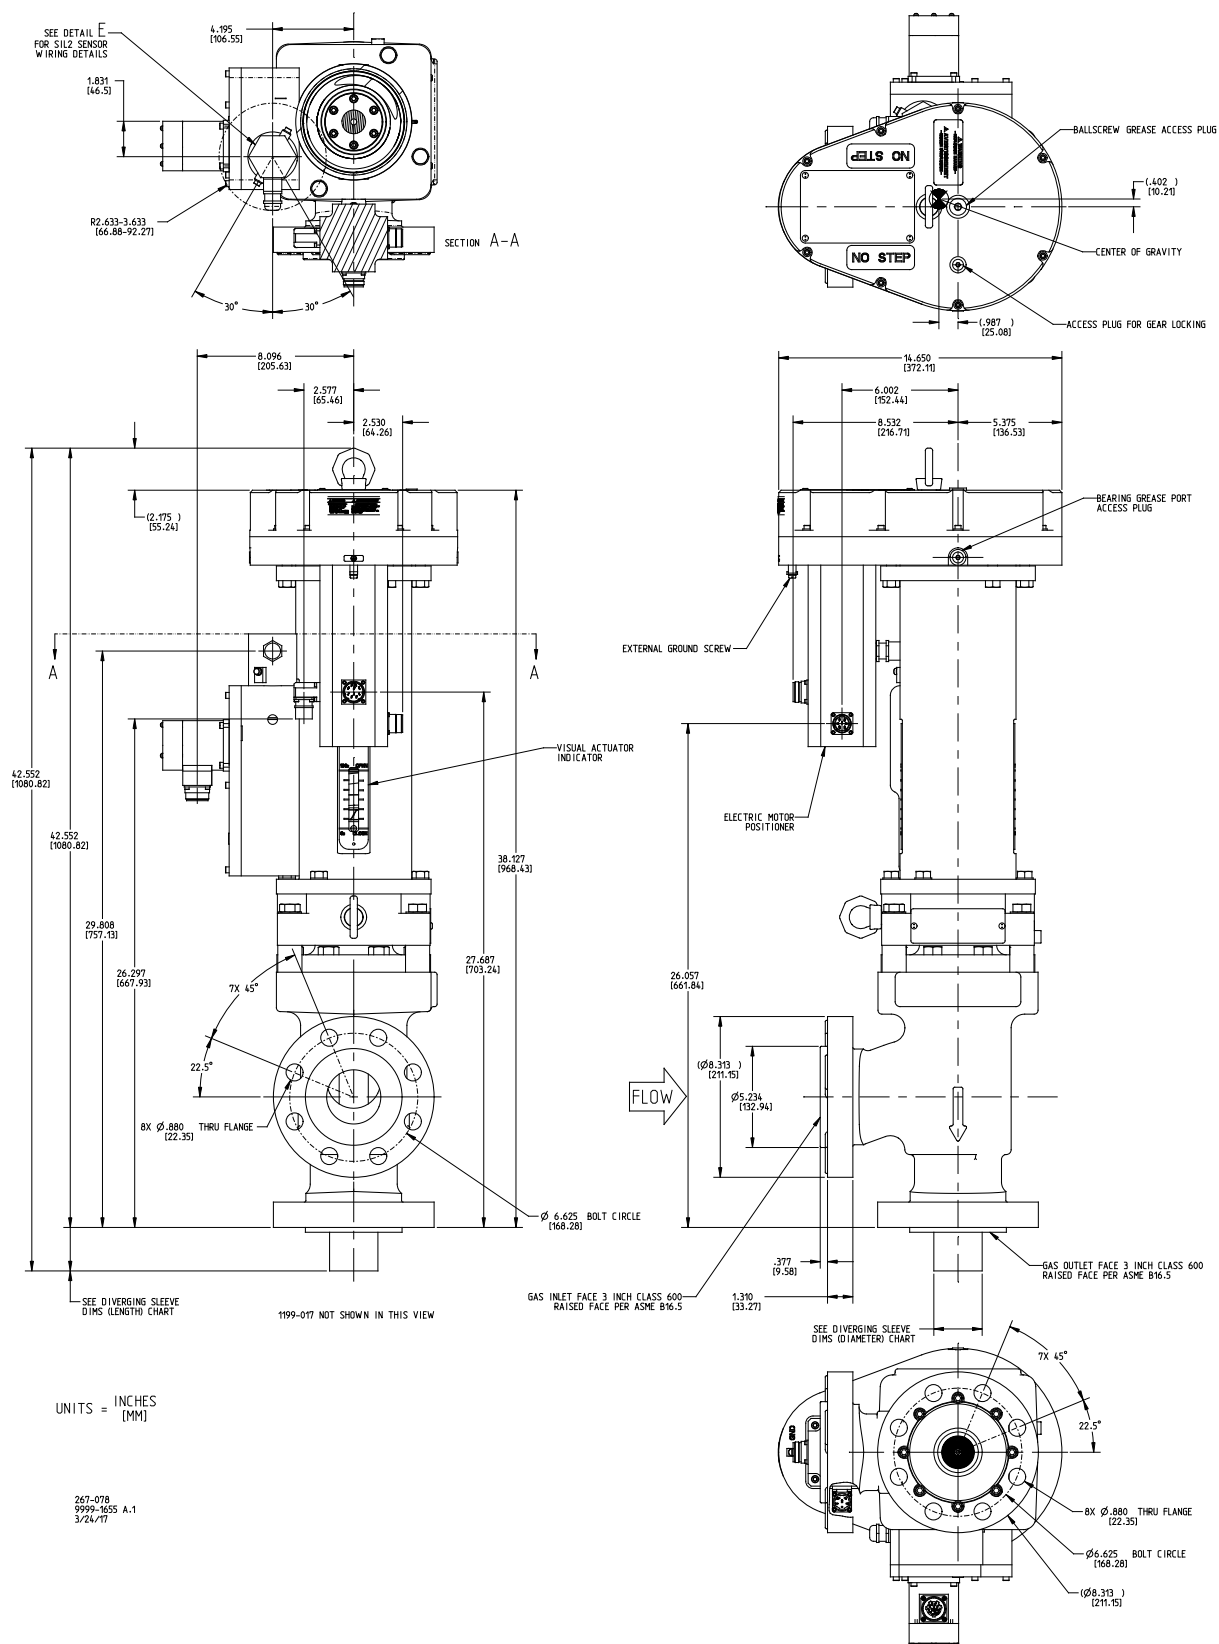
Outline Drawing (3-Inch HR LESV)
